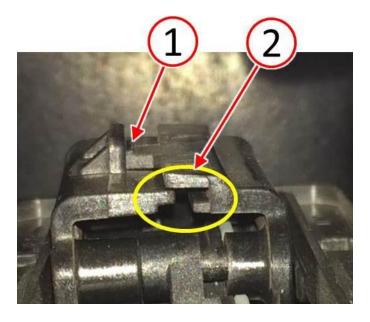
Inspect Actuator Motor Case Housing For Separation
